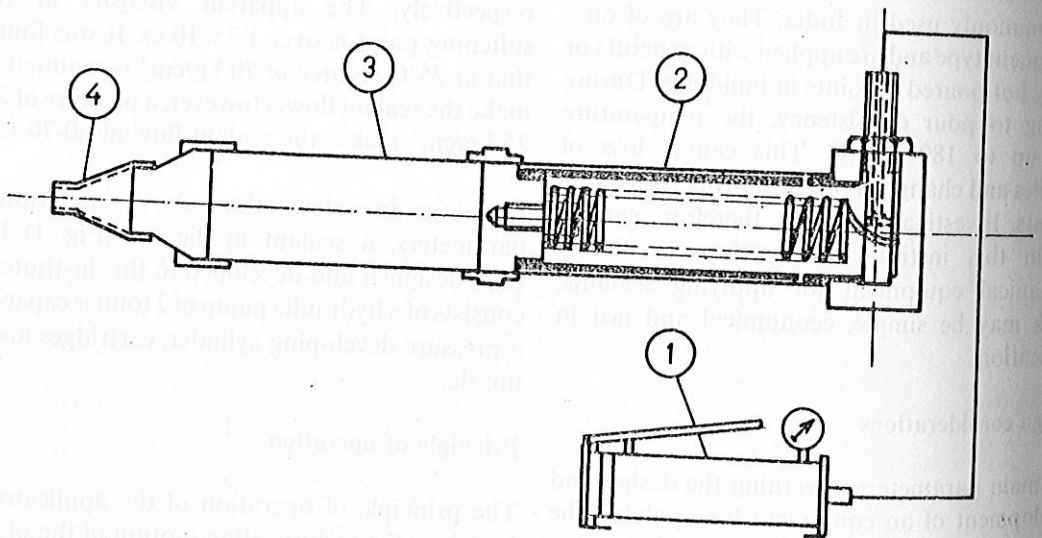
The applicator: Schematic view [(1) Hydraulic pump; (2) pressure developing cylinder; (3) cartridge; and (4) nozzle]
